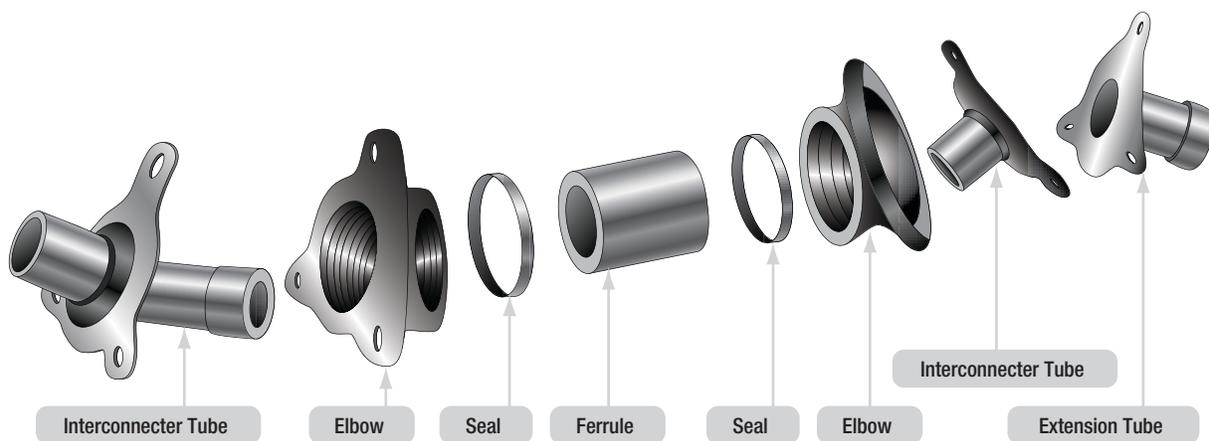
Interconnecting flame tubes for can-type combustion chambers.
